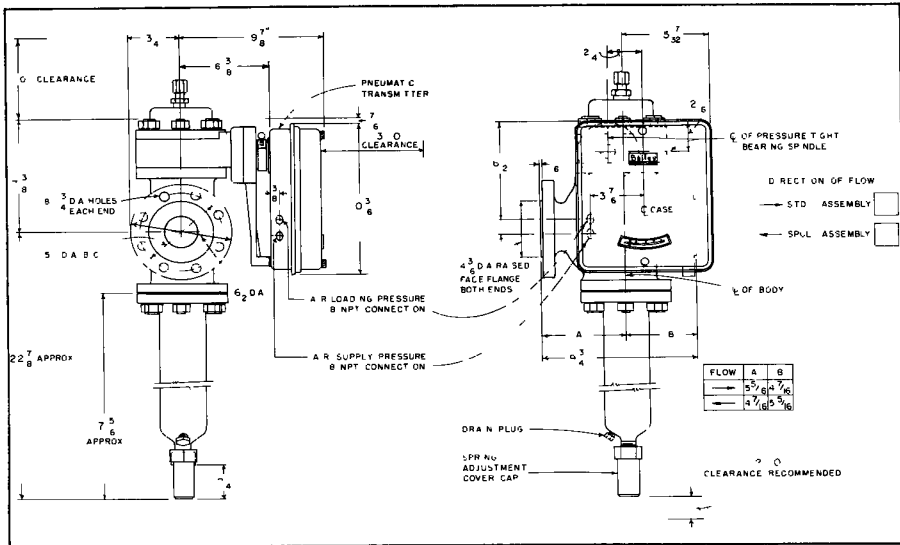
Mounting Dimensions, 2 inch Area Meter, 250 psi (Type JR13□□A)
